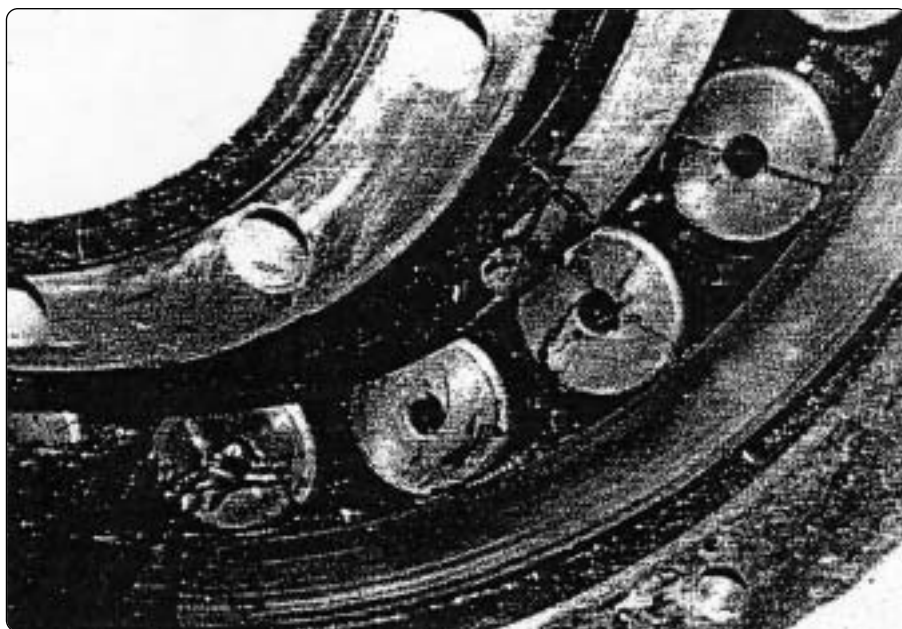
Cracked bearing rollers and inner race, DSS 63, December 1989.
